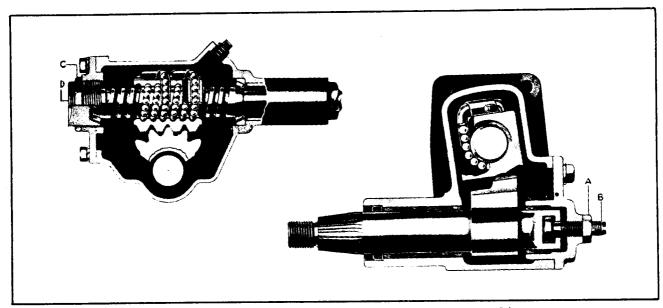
STEERING GEAR (CONVENTIONAL)
